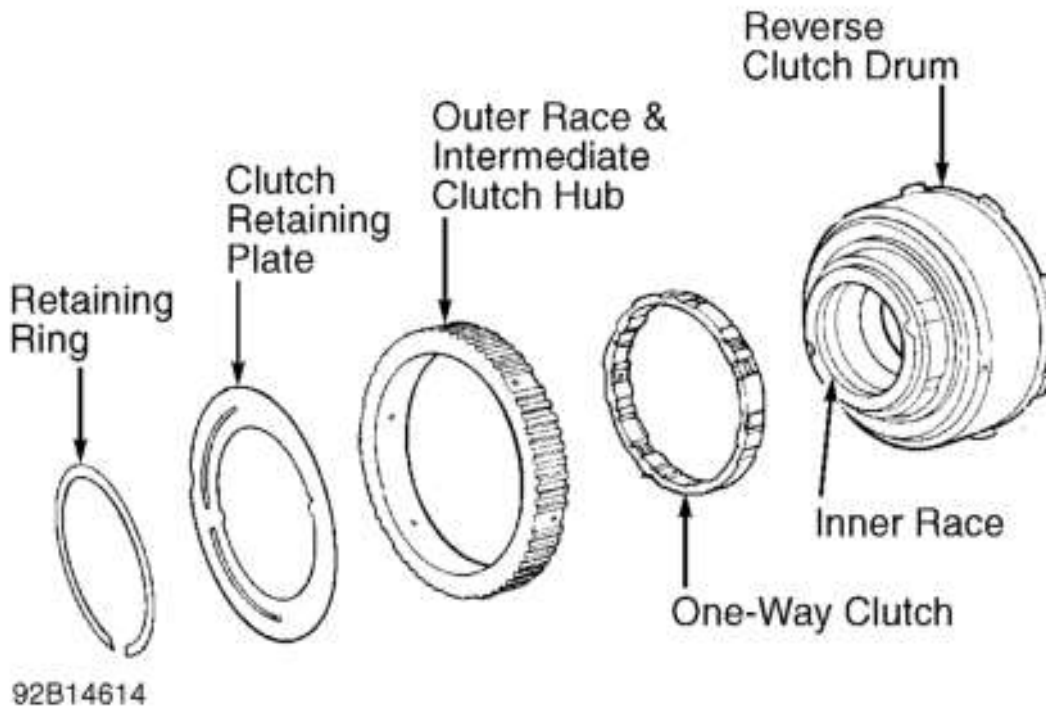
Exploded View Of Intermediate One-Way Clutch Assembly
